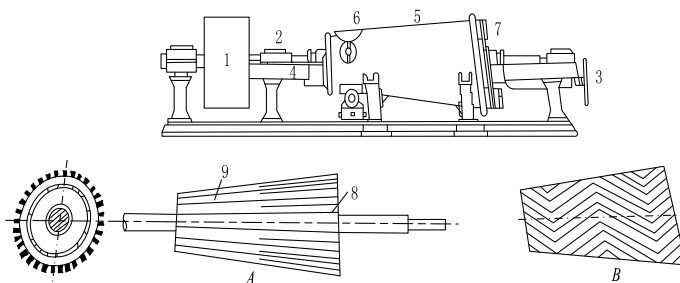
The structure of cone-shaped chopper [2]: 1, 2—the traditional system, 3—hand wheel regulator, 4—track, 5—shell of chopper, 6—nitrocellulose slurry inlet, 7—NC slurry outlet, 8—blade, and 9—blade holder
